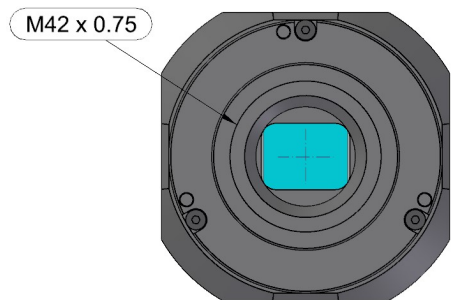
C1+ camera head with C1 compatible adapter front view dimensions
